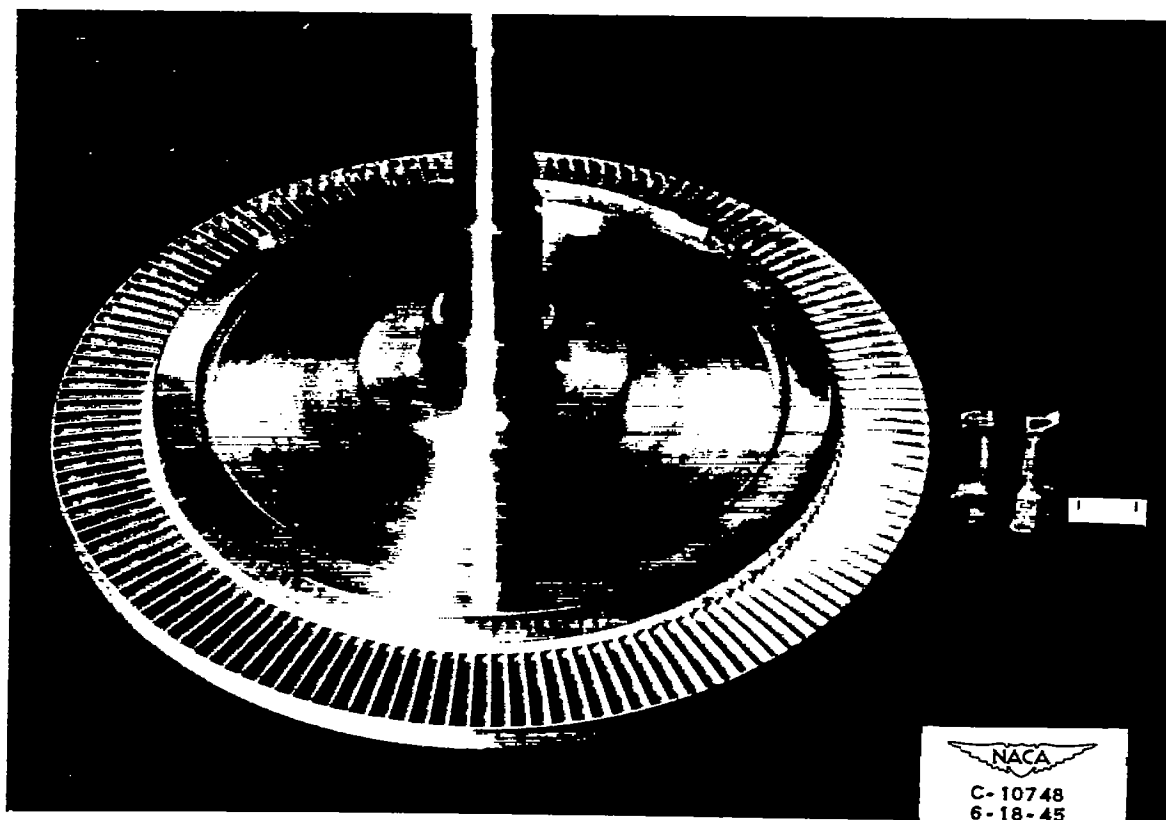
Photograph of assembled rotor showing rotating cylindrical shroud formed by blade caps.
